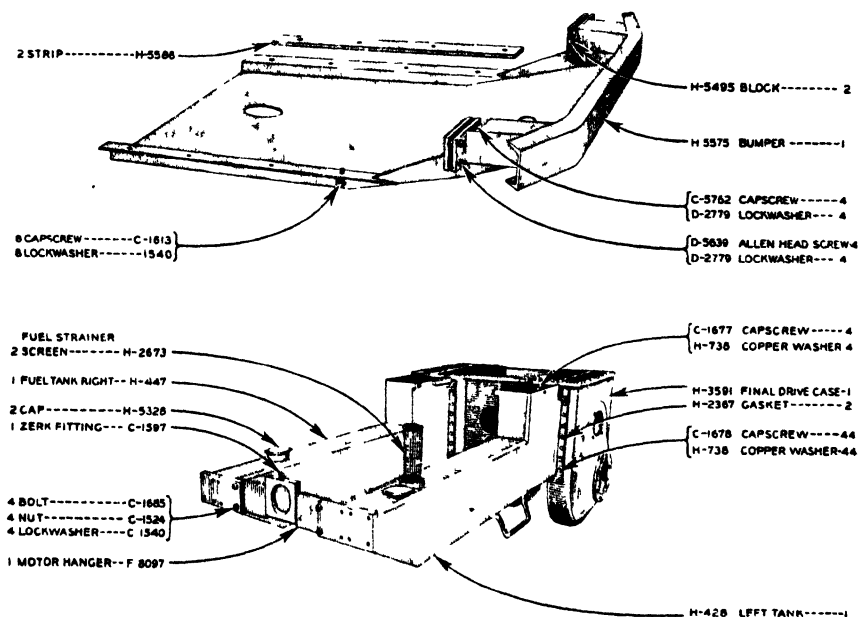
Detail of the parts of original arc welded model of transmission case.
